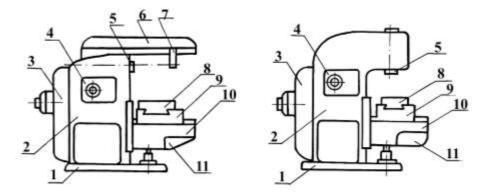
Horizontal (a) and vertical (b) milling machines: 1-base; 2-column; 3-electric motor with belt transmission; 4-spindle speed gear box; 5-horizontal or vertical spindle; 6-overarm; 7-outer arbor support; 8-table; 9-slide; 10-knee; 11-feed gear box
